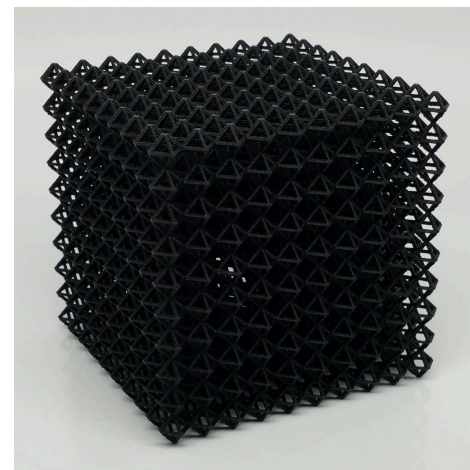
This 3d-printed lattice structure consists of repeated cells, but cannot be disassembled.
